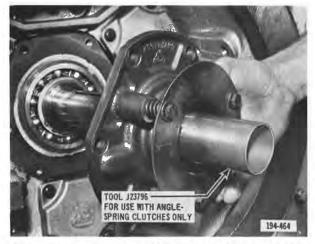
Installing Main Drive Pinion Bearing Cover Assembly
